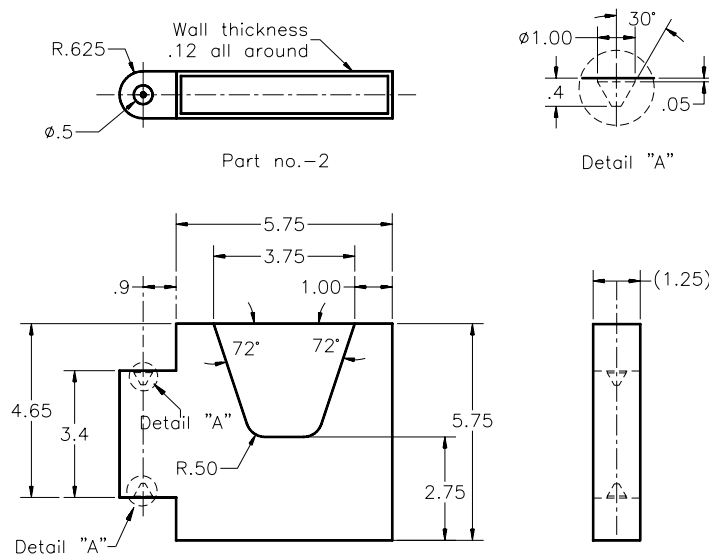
Detail drawing (piece part drawing) of Part Number 2
